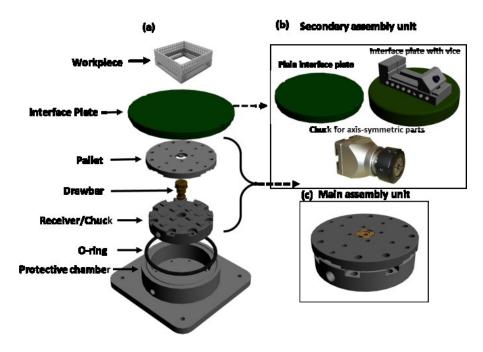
The schematic representation of the PBF modular workholding device for AM enabled process chains: (a) exploded view, (b) secondary assembly unit and (c) main assembly unit
